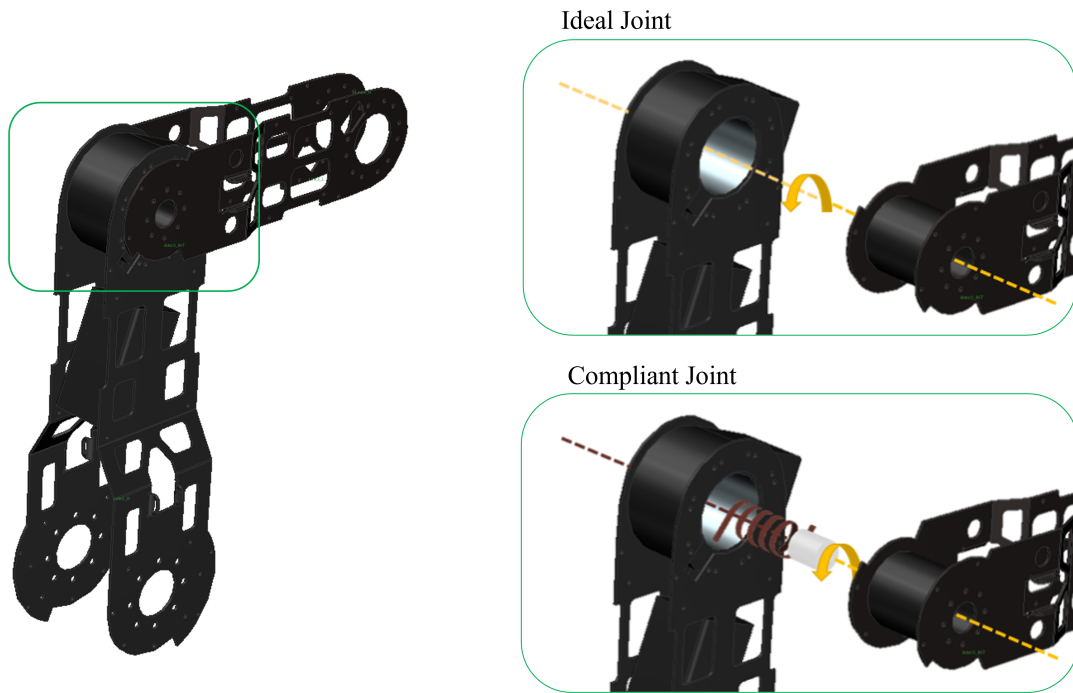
Scheme of modeling technique for rigid and compliant revolute joints using as example the sub-assembly of L2, M3 and L3.
